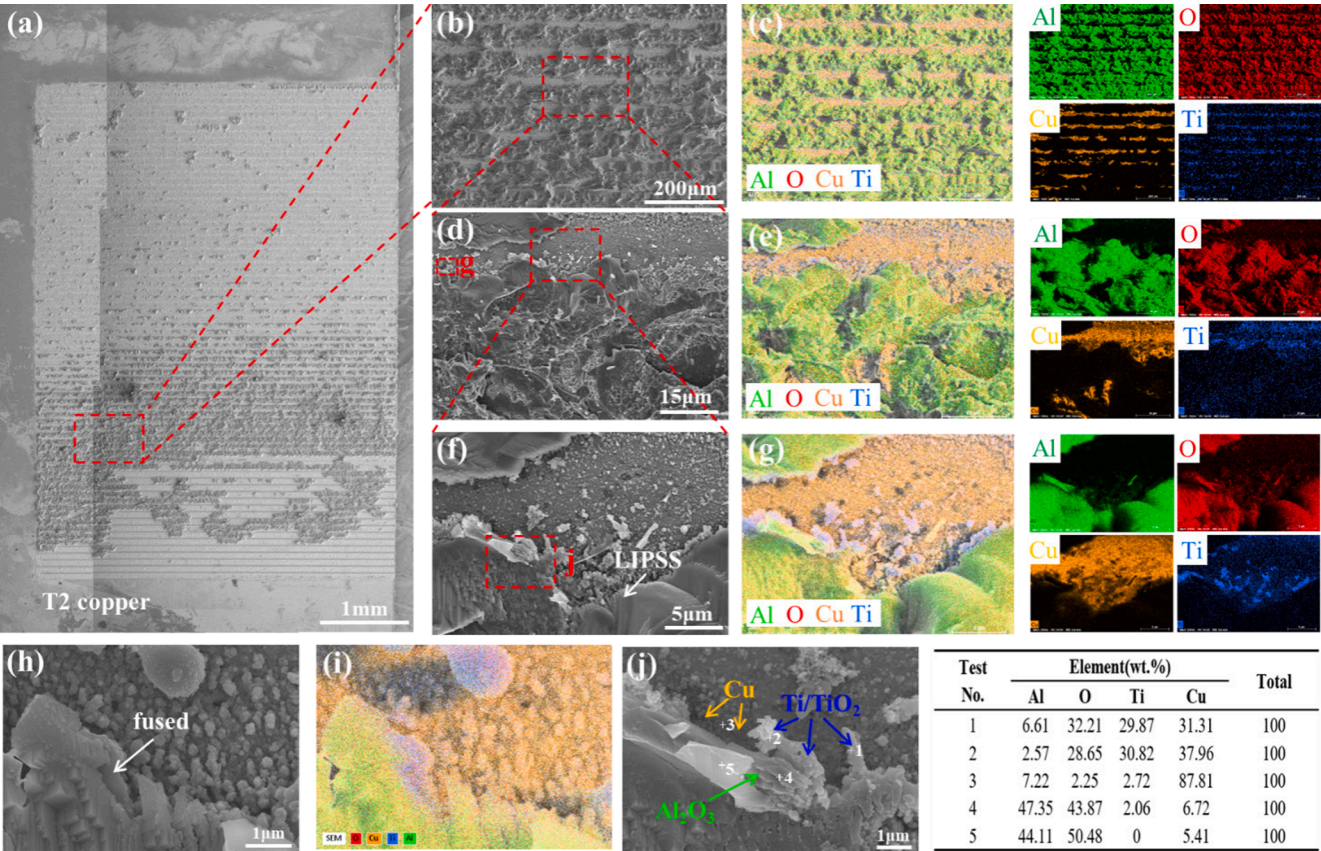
Morphologies of fracture of femtosecond laser-induced micro-welded joints of Ti-coated sapphire and Cu. (a) Overall macro-morphology of fracture in the Cu side; (b)–(h) micro-morphologies and composition distribution on fractures.
